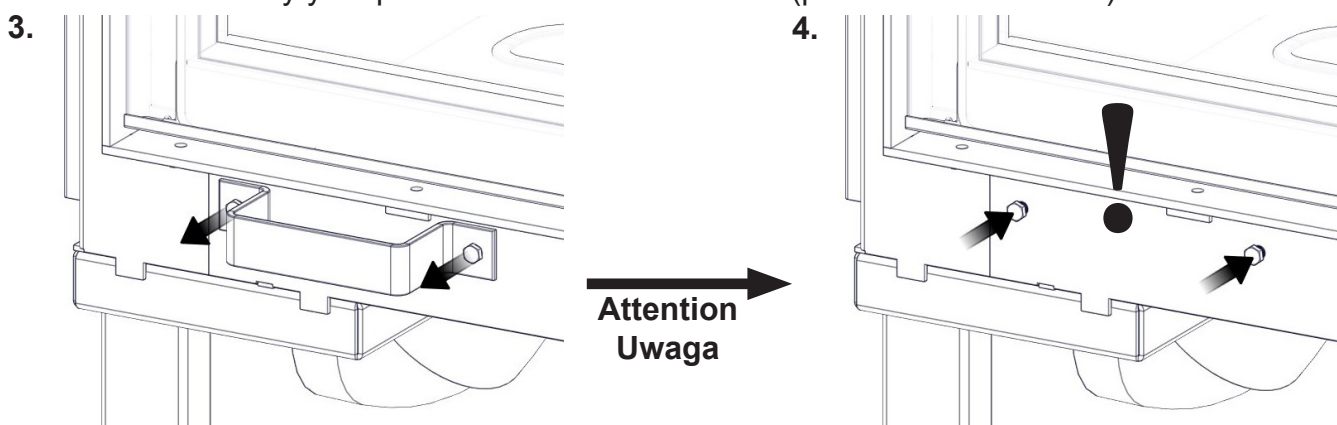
aLift handles - assembling 1-2 (before adjusting the insert) /
